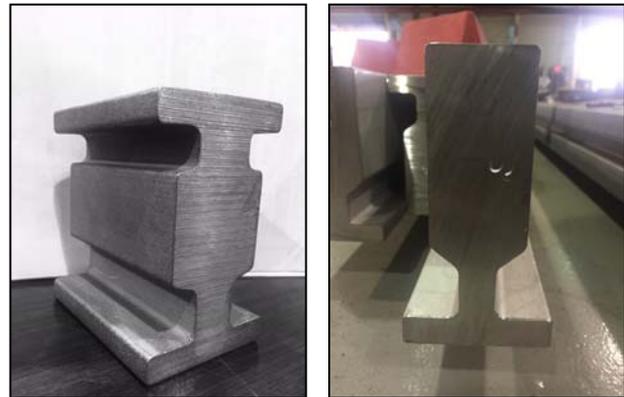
Extruded and straightened sections of SS316 used for valve bodies utilized for a variety of industrial applications.
